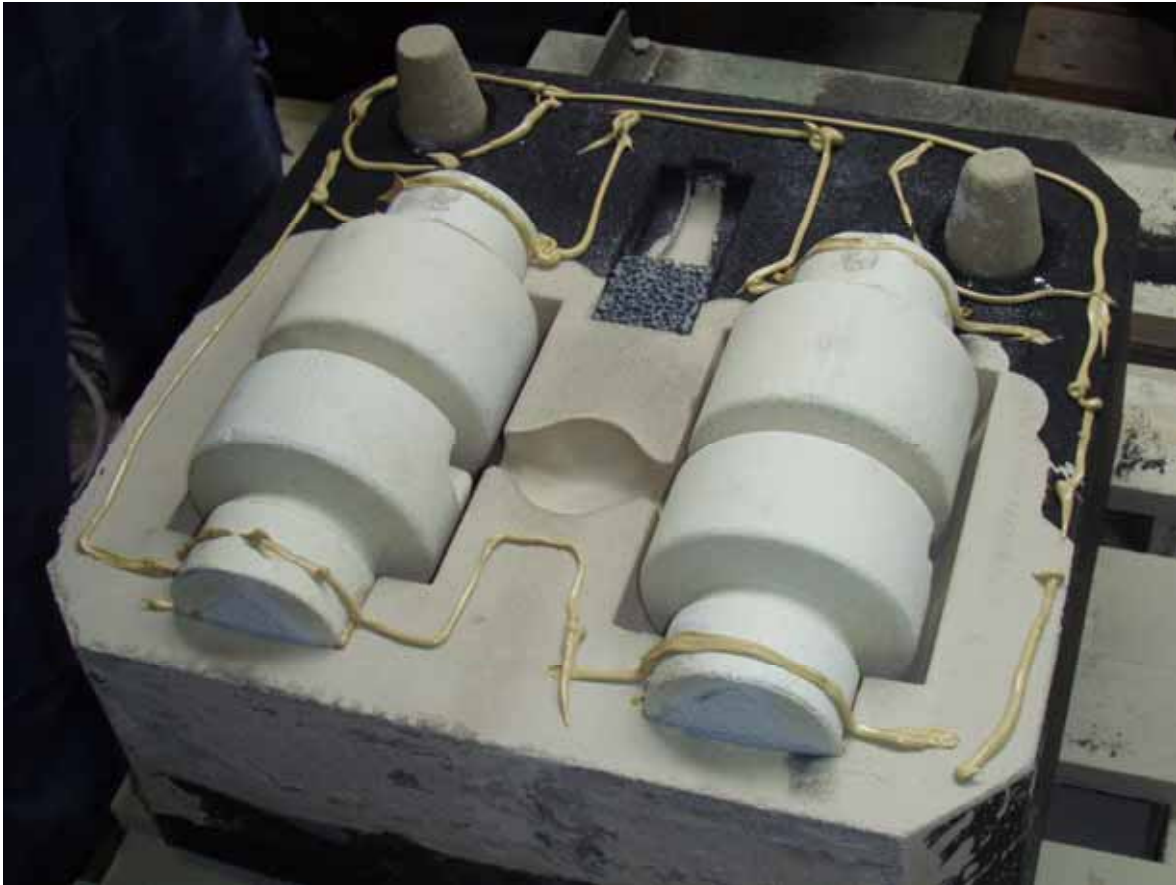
The picture is showing the drag prior to assembly. The cores and the filter are positioned.
